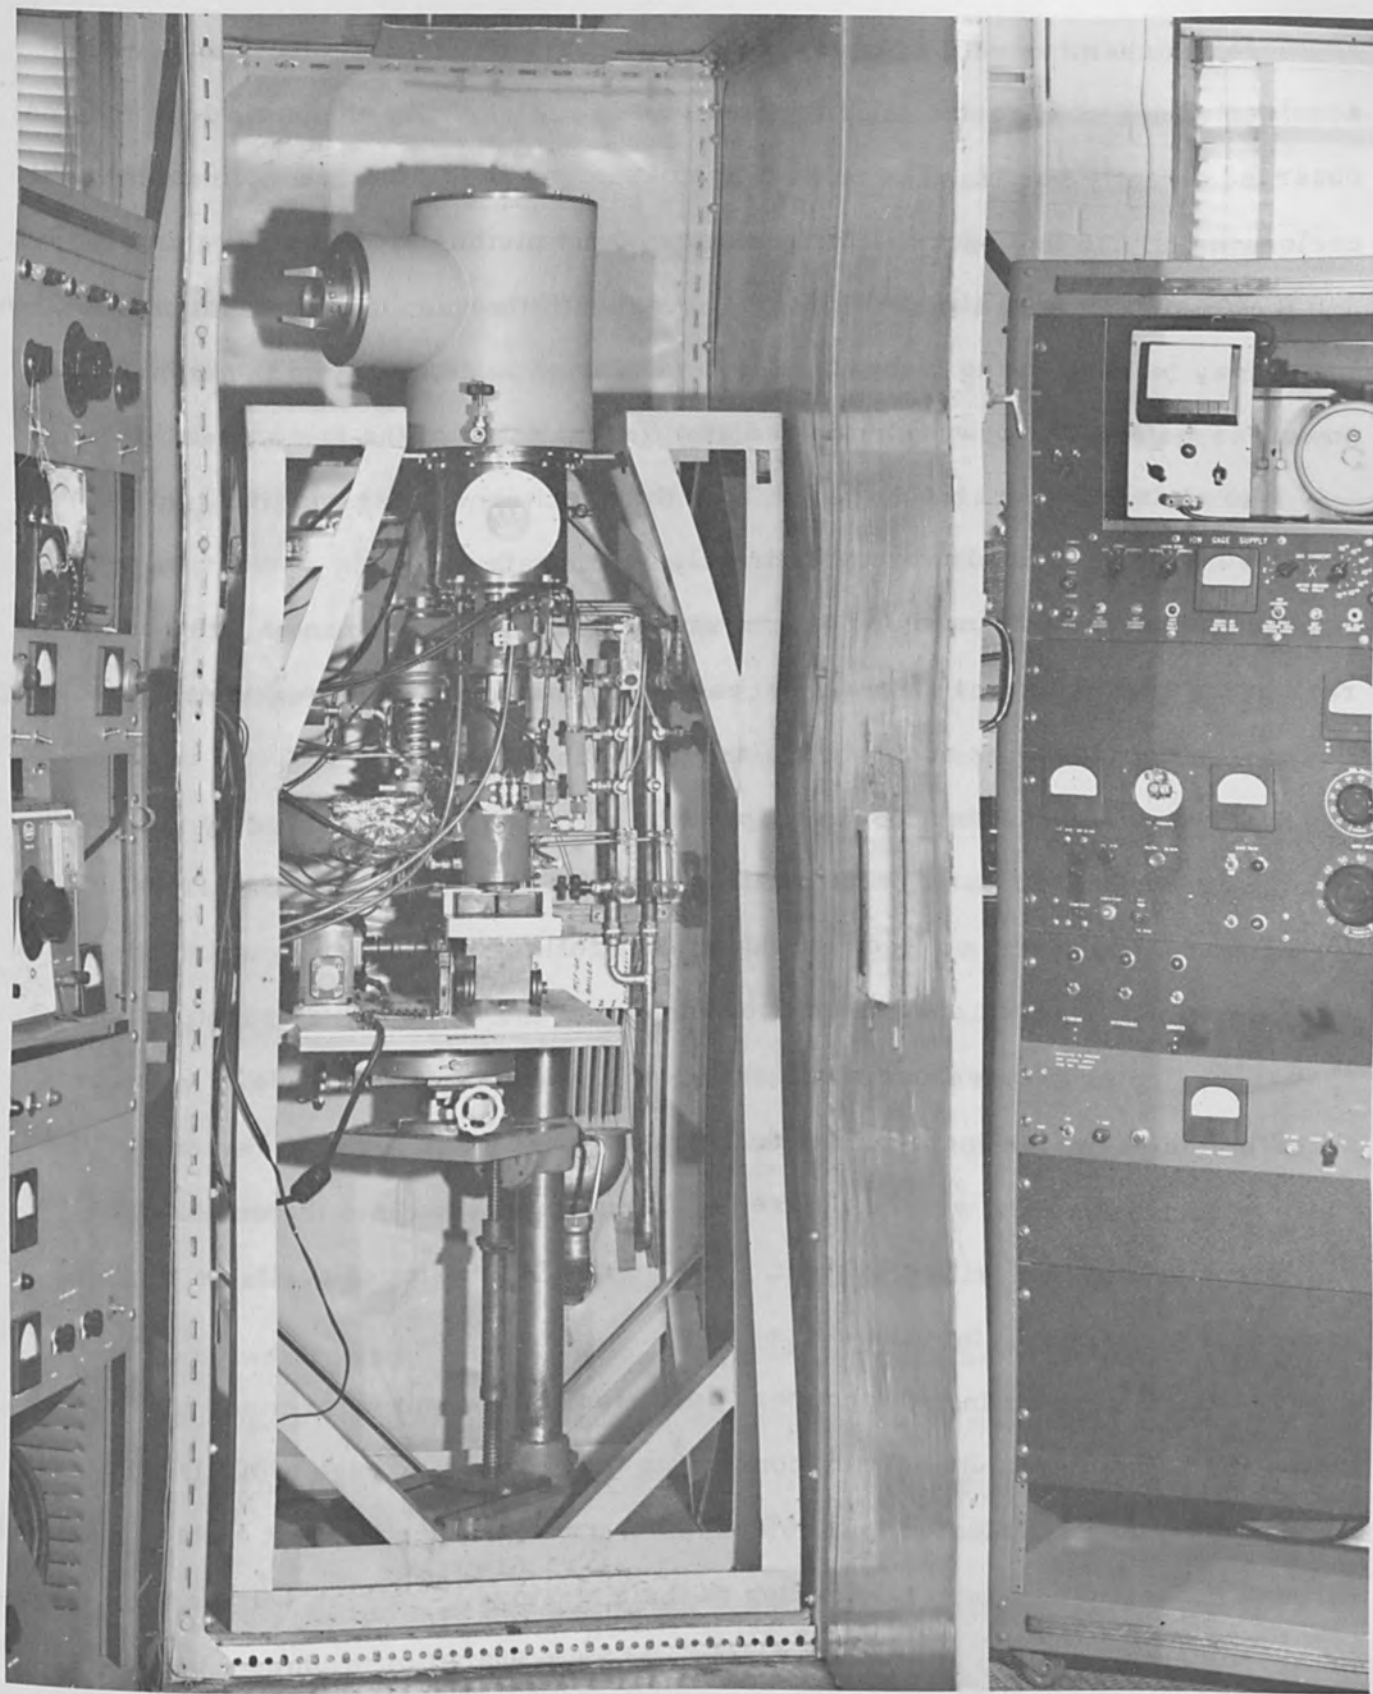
Photograph of laboratory atmospheric welder.
